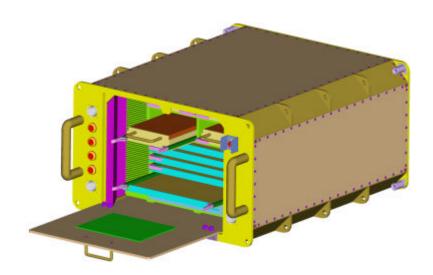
Install CompactPCI boards, Power Supply board and Hard Drives
